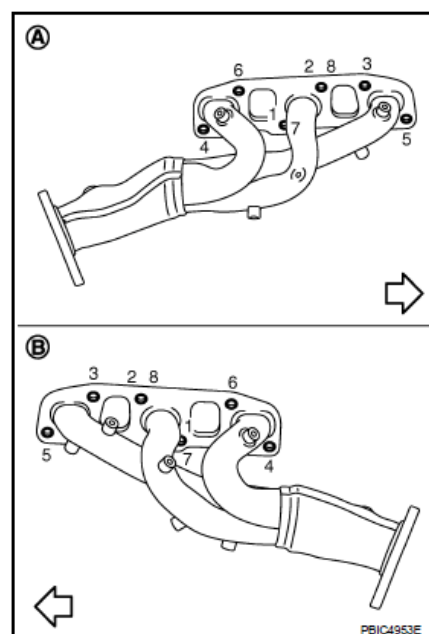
Identifying Mounting Exhaust Manifold Nuts Tightening Sequence
